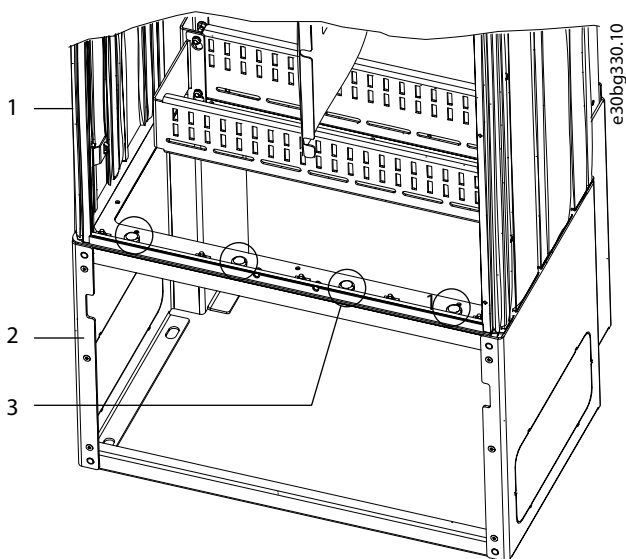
Pedestal-to-Cabinet Front Mounting Points
